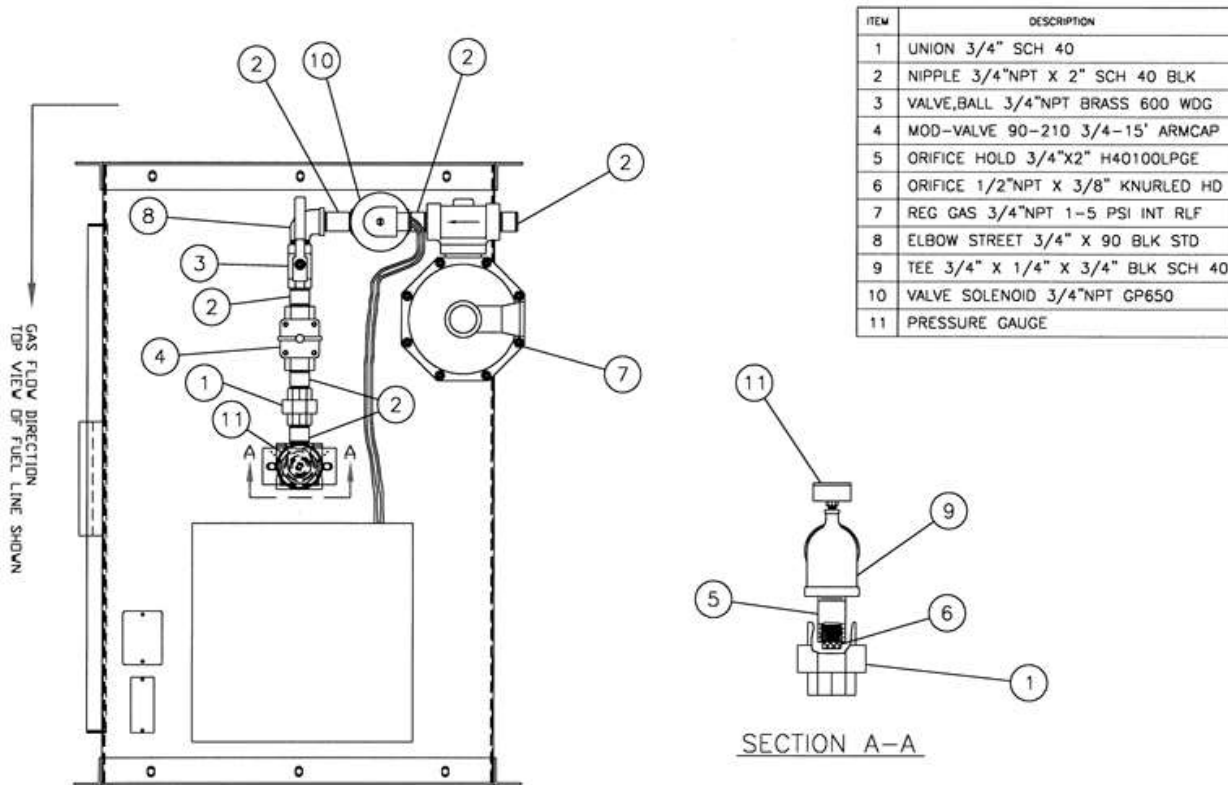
MOD VALVE KIT ASSEMBLY FOR DOWNSTREAM HEATERS (MODELS: H1015, H2025, OR CH1015)
